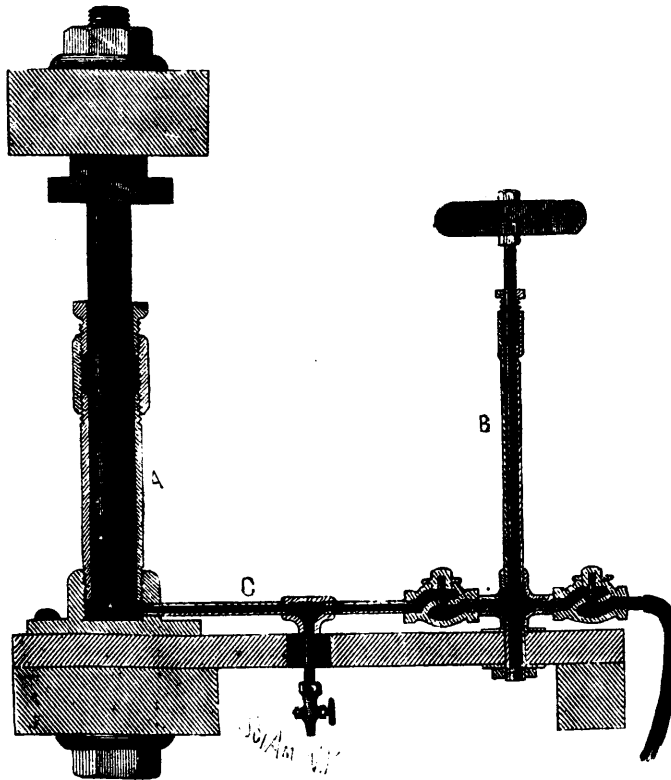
SECTIONAL VIEW OF SIMPLE HYDRAULIC PRESS.
